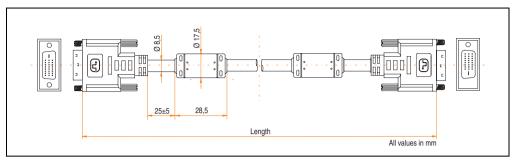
Dimensions - DVI cable 5CADVI.0xxx-00
